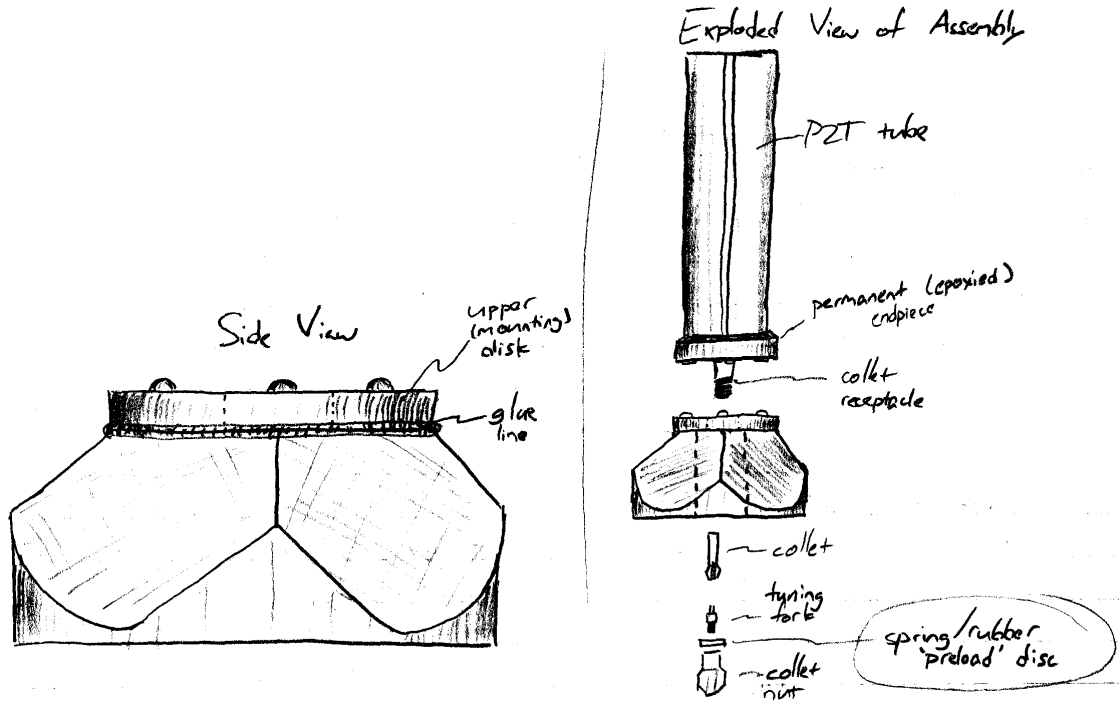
Sketch of a candidate design for the scanner assembly, with a removable corner cube target.
